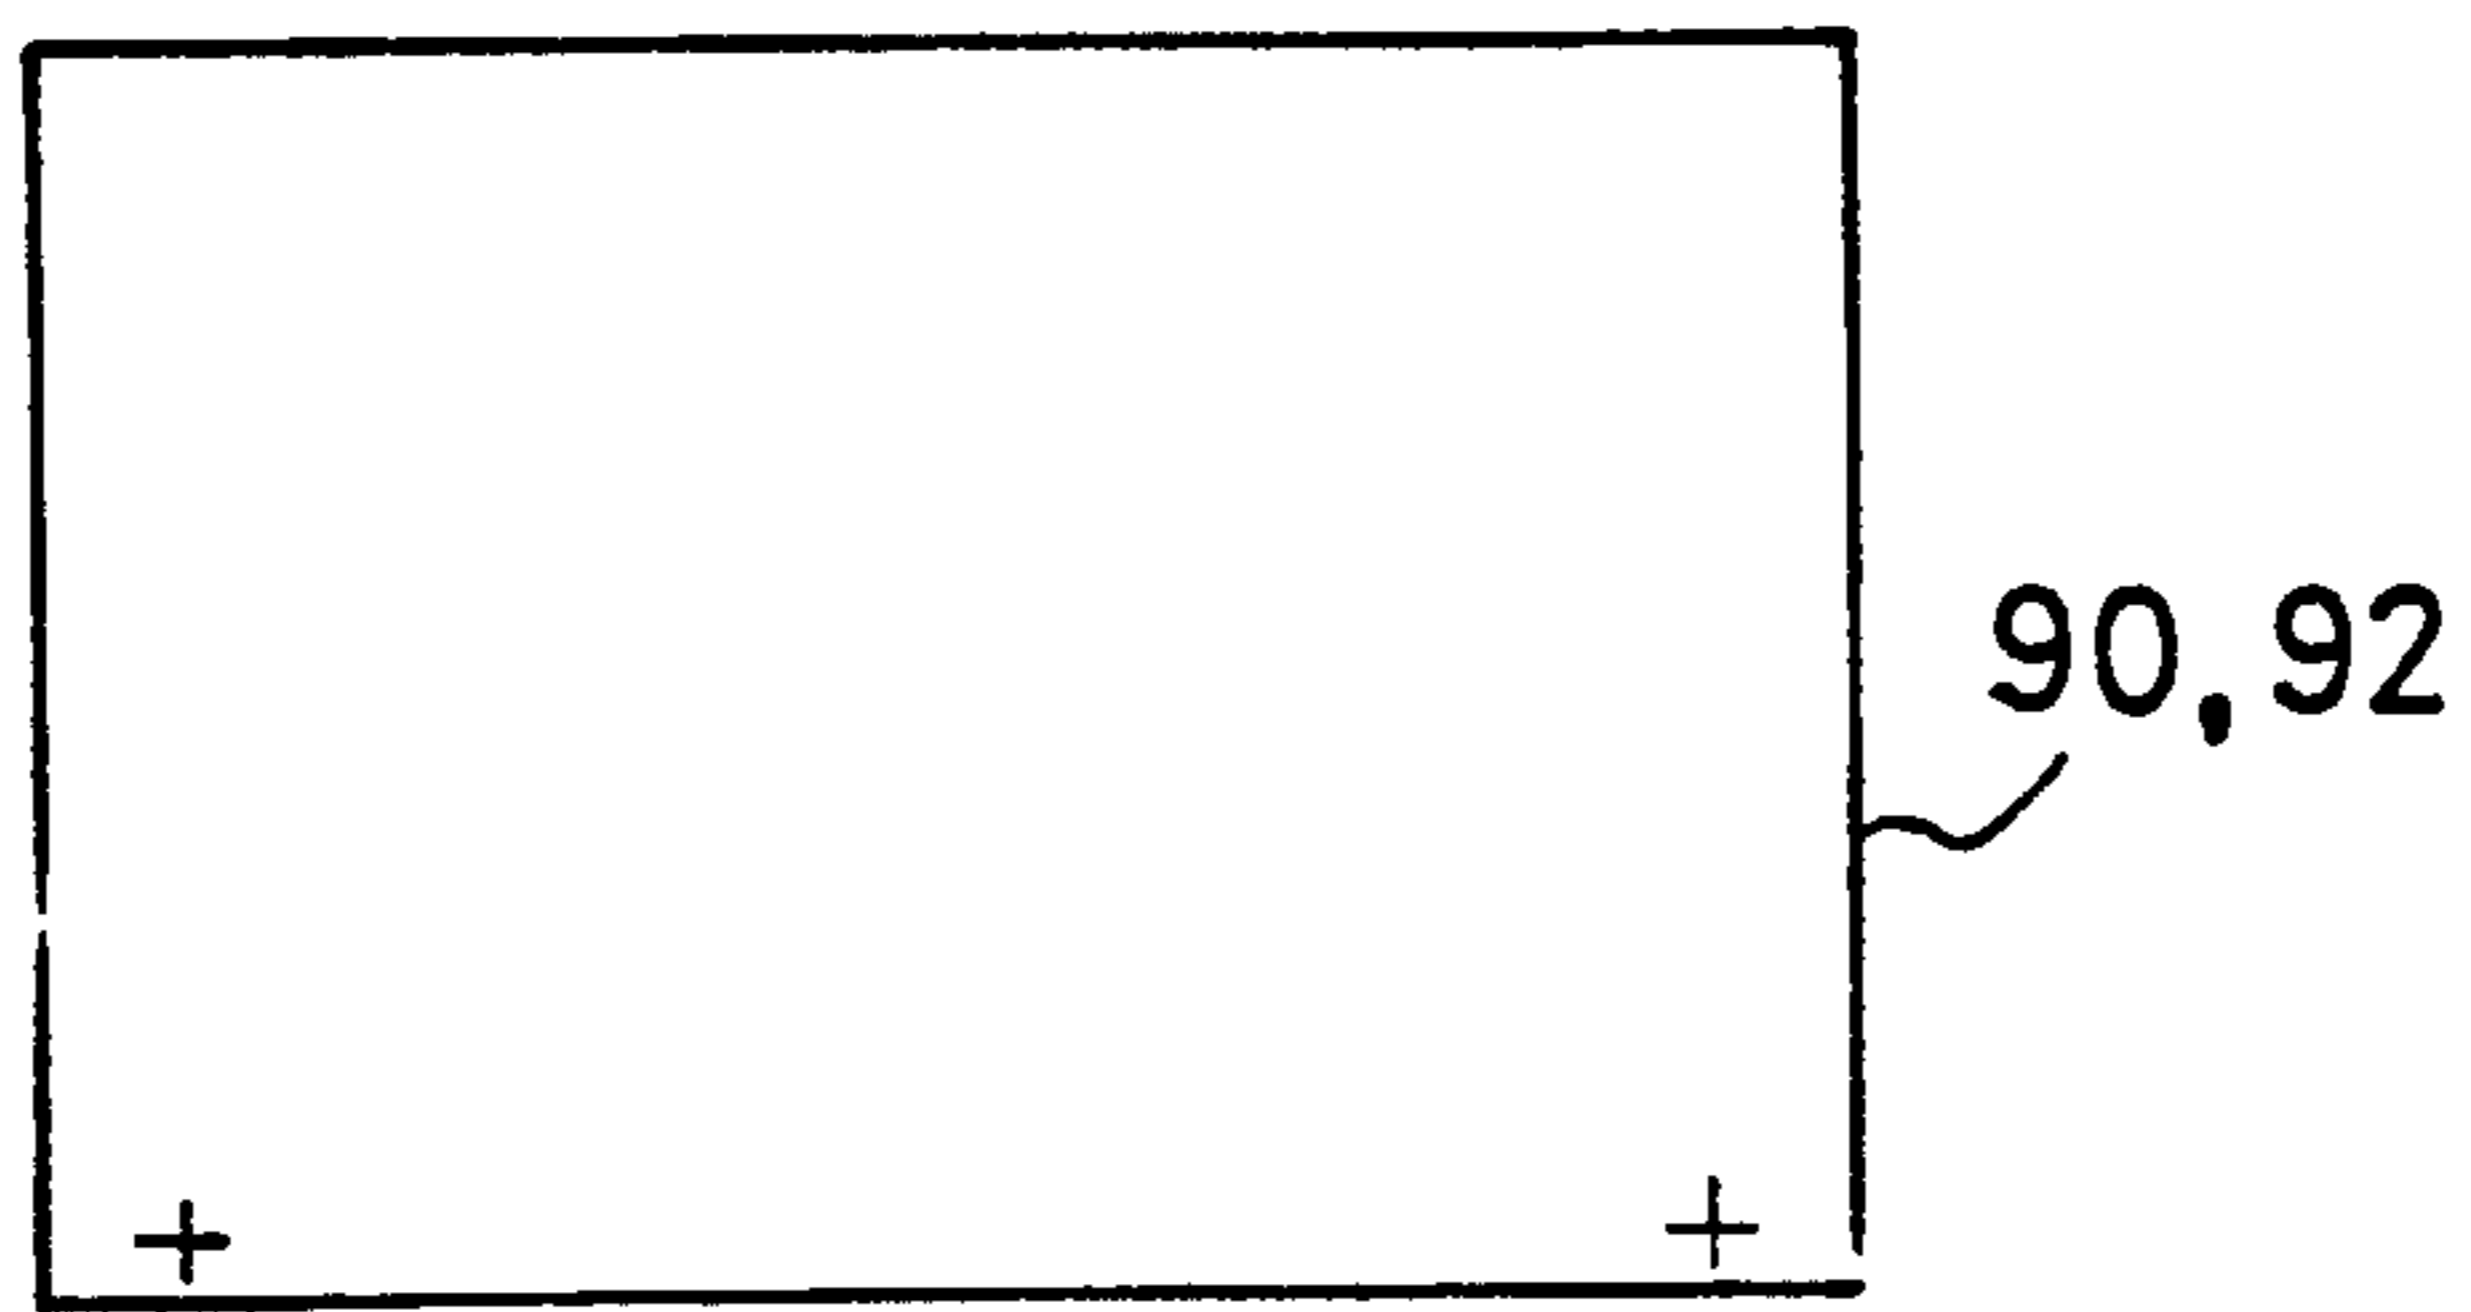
PLATE COCKING APPARATUS FOR SHEET-FED PRINTING PRESS
